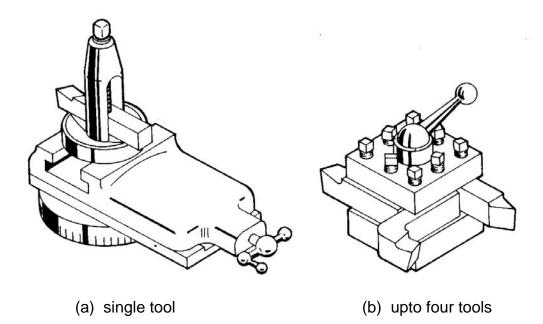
Mounting of shank type lathe tools in tool posts.
